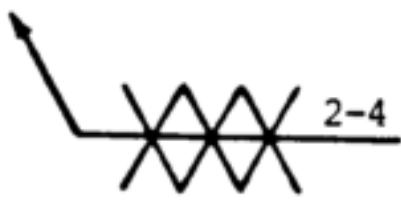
Dimensioning of intermittent resistance seam welds.
